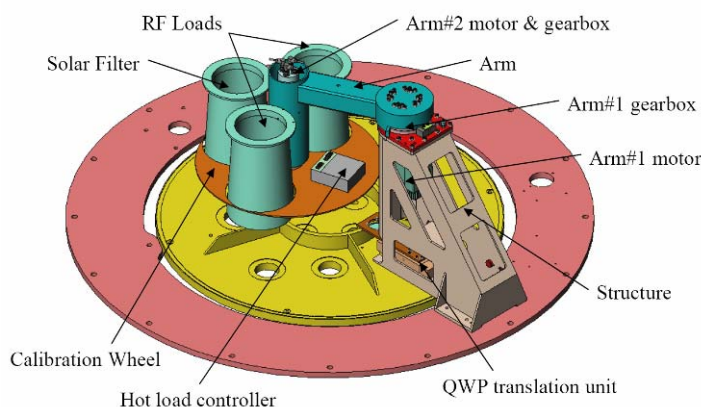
CAD drawing of the Amplitude Calibration Device (top – side view)
